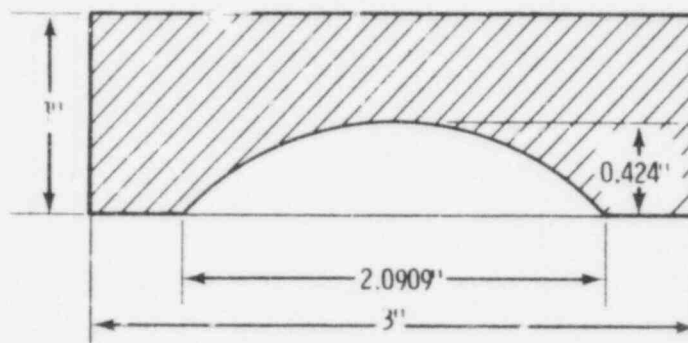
Specimen Geometry, Notch Dimensions, and AE Sensor Locations for SN Specimen 1-2A-4A
